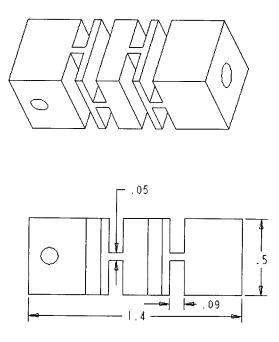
CAD drawing of experimental flexural coupling. Dimensions in inches.
